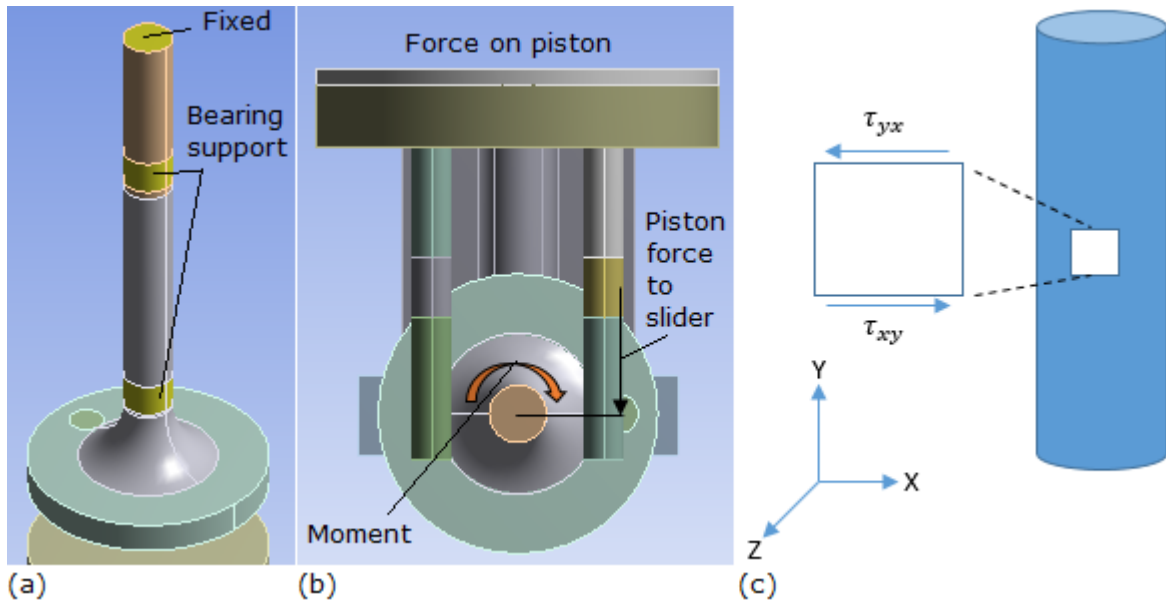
(a) Fixed and free boundary condition at top shaft section, (b) Moment on shaft due to piston force, (c) shear stress element diagram on the outer diameter of top shaft section.
